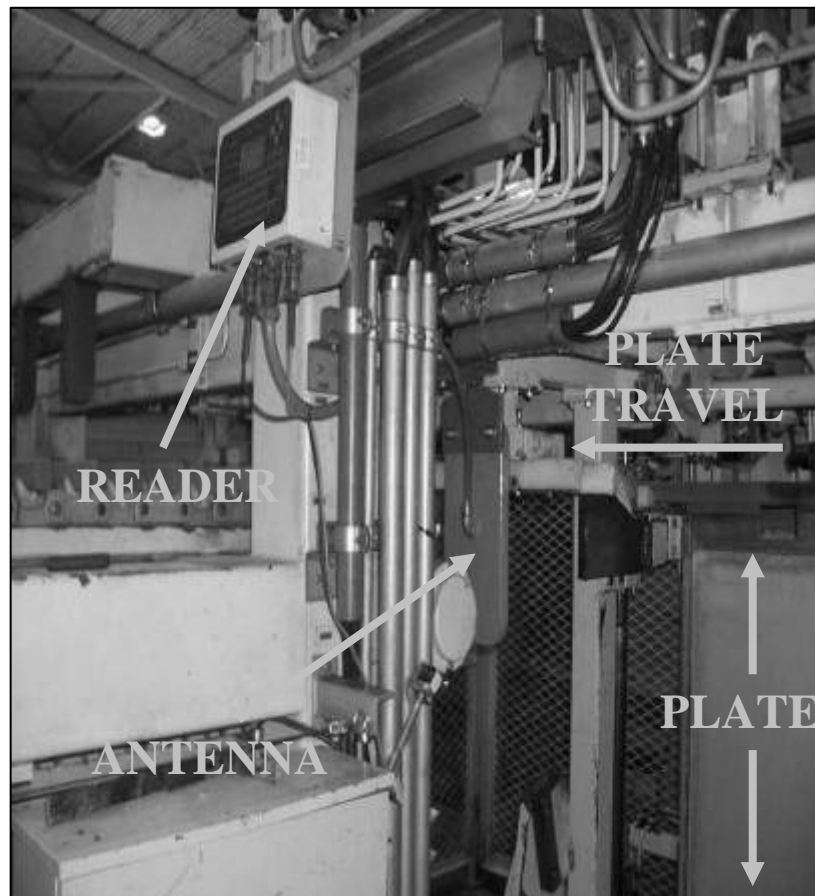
RFID reader mounted to a Cathode Stripping Machine
